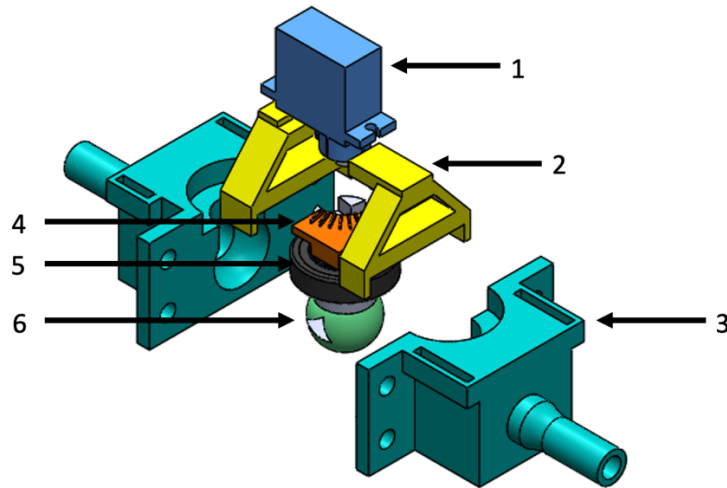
Schematic of the TTV and cold plate assembly in the fixture
